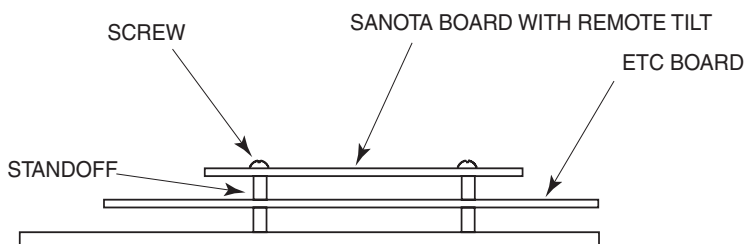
Mounted ETC Board and Sanota Board with Remote Tilt Board
